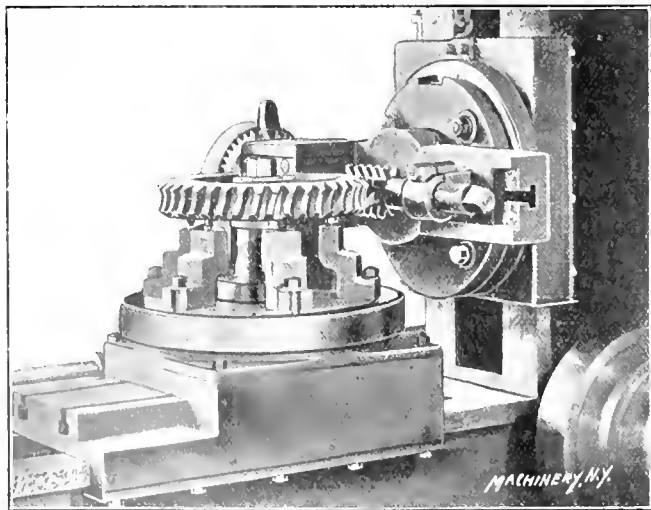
The Machine arranged for Hobbling Worm-wheels.
